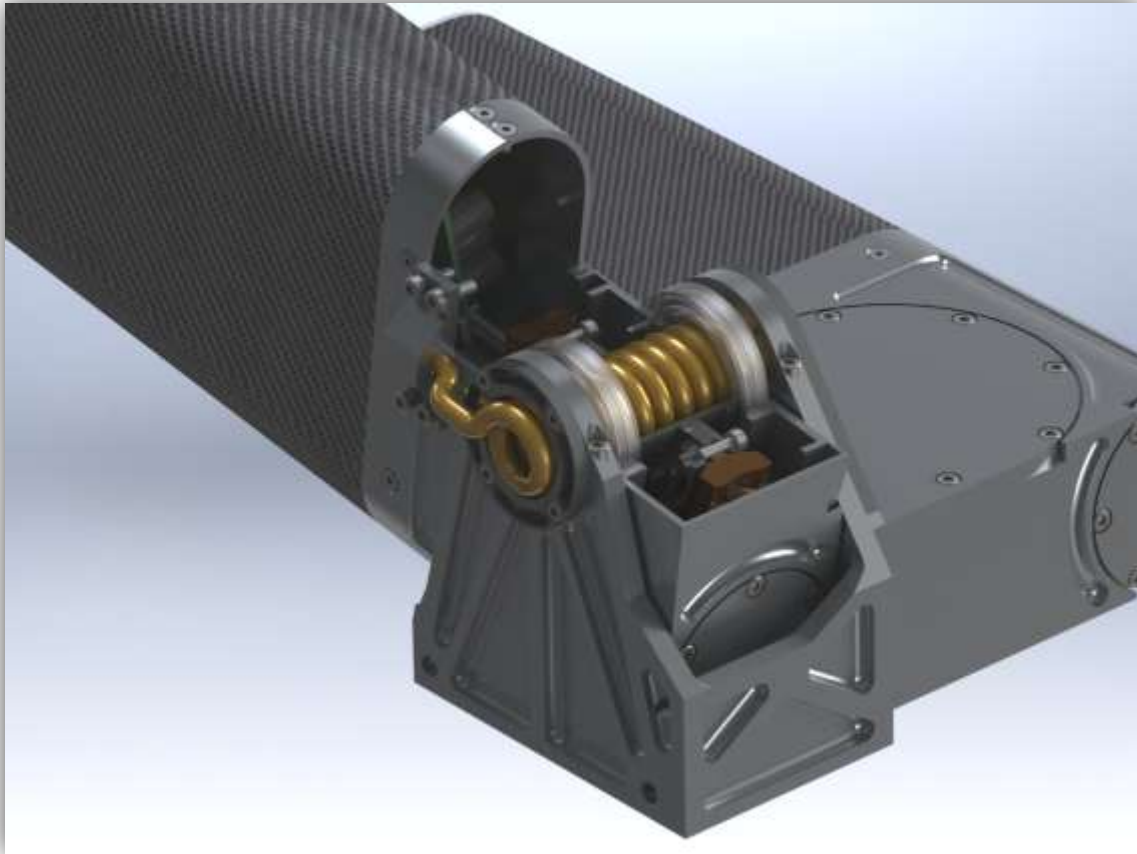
Render of Bottom of Arm with Cutaway showing Torsion Spring (Bearings Transparent and Spring Cover Hidden)
